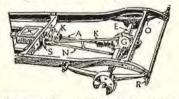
One type of construction of a torque arm is shown in the illustration. Note the arm (N), extending from the rear axle housing to a spring arrangement or torque pillar attached to a cross member, in line with the drive shaft. See illustration (S) (N).
